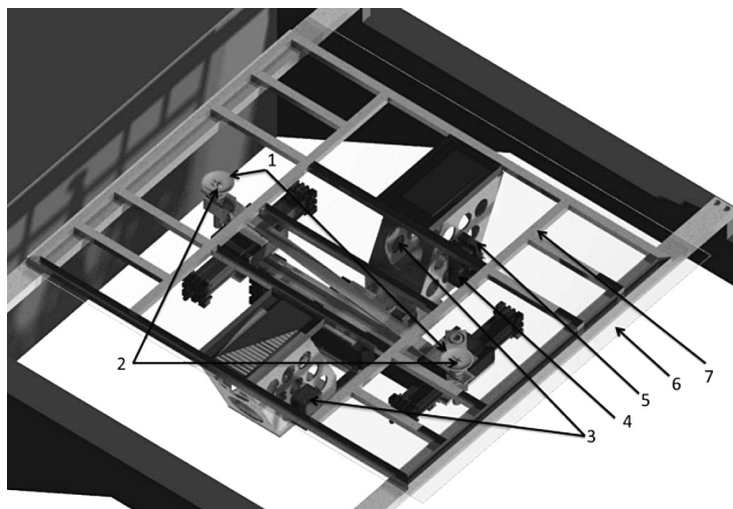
Schematic diagram of gripping metal sheet using pneumatic suction cup
